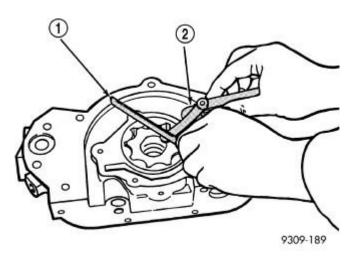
Measuring Clearance Between Rotors Courtesy of CHRYSLER LLC
